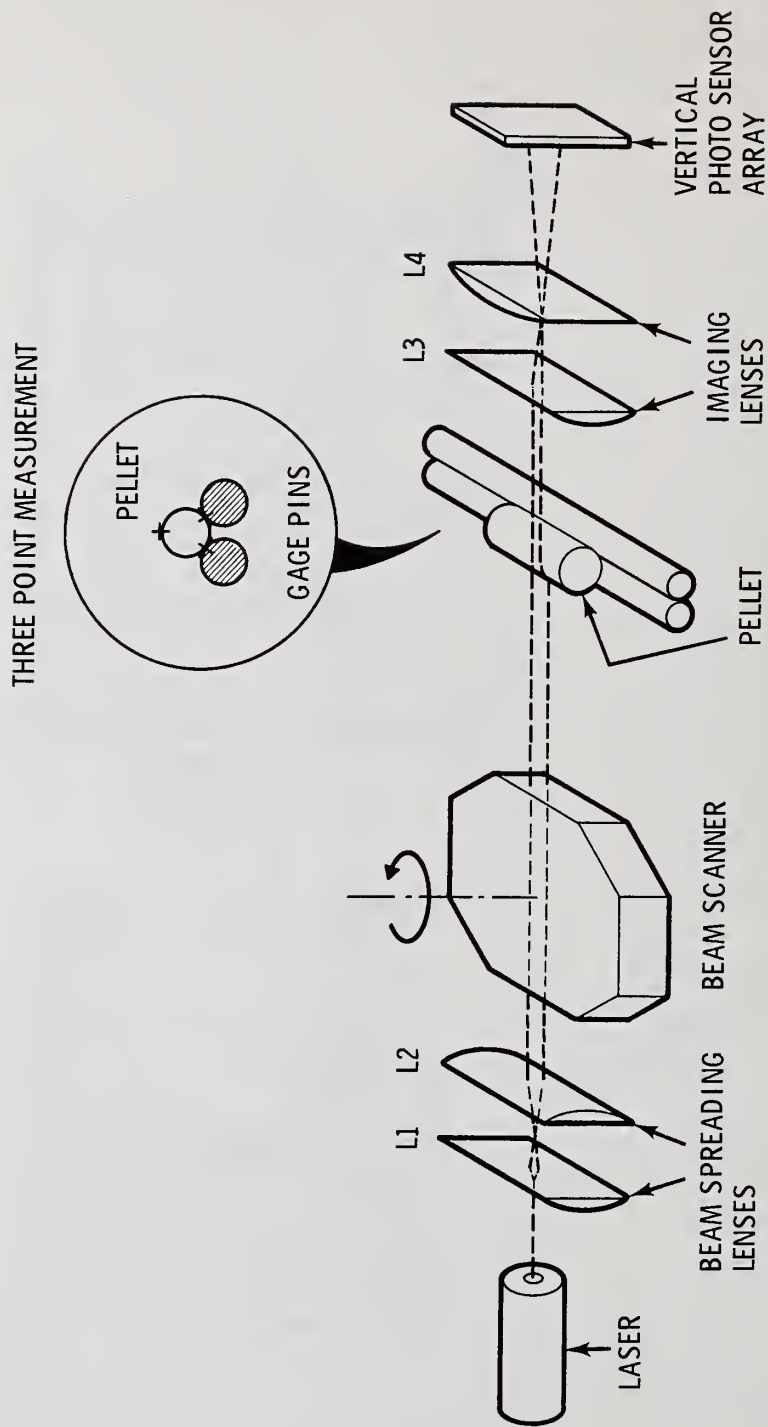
Schematic Diagram of Fuel Pellet Diameter Inspection Station
